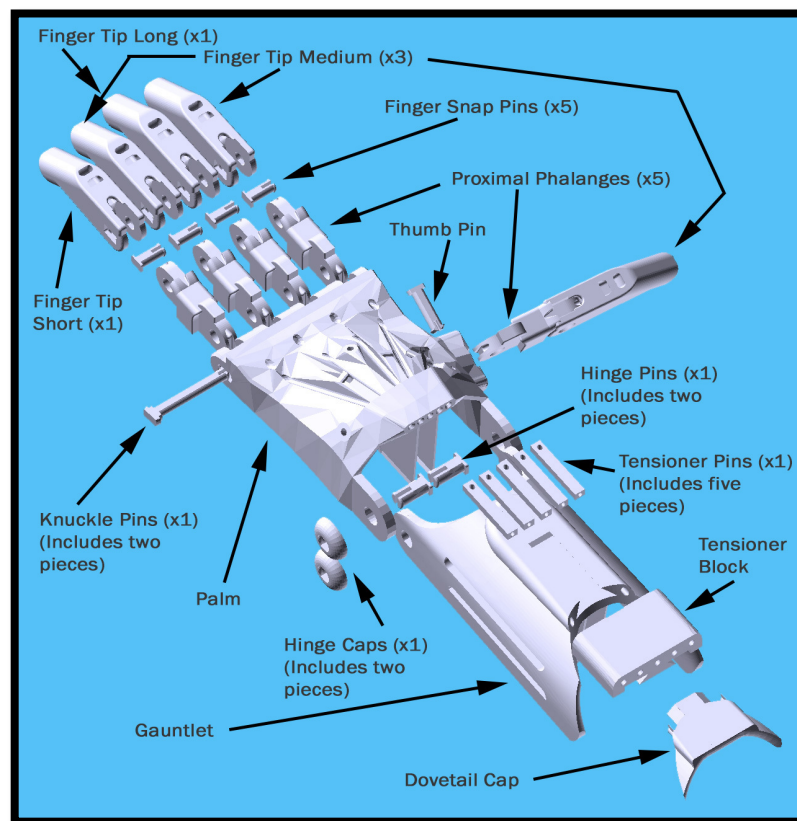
An exploded view of the Raptor Hand, a 3D-printed, wrist-actuated prosthetic hand from e-Nabling The Future (“Raptor Hand”).
